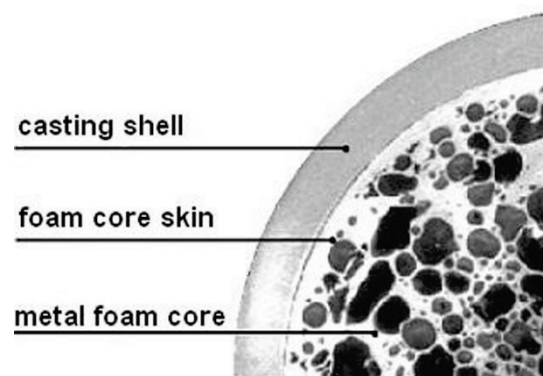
Cross-section of segment of casting product with the aluminium foam core
